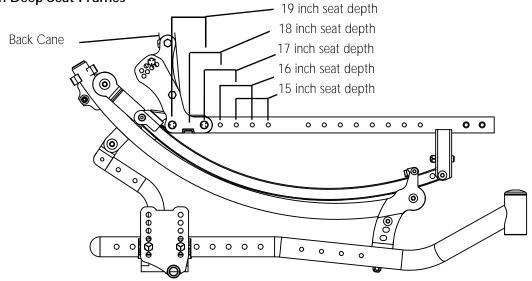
Adjusting the Seat Depth - Removing Backrest Brackets/Back Cane Assembly
